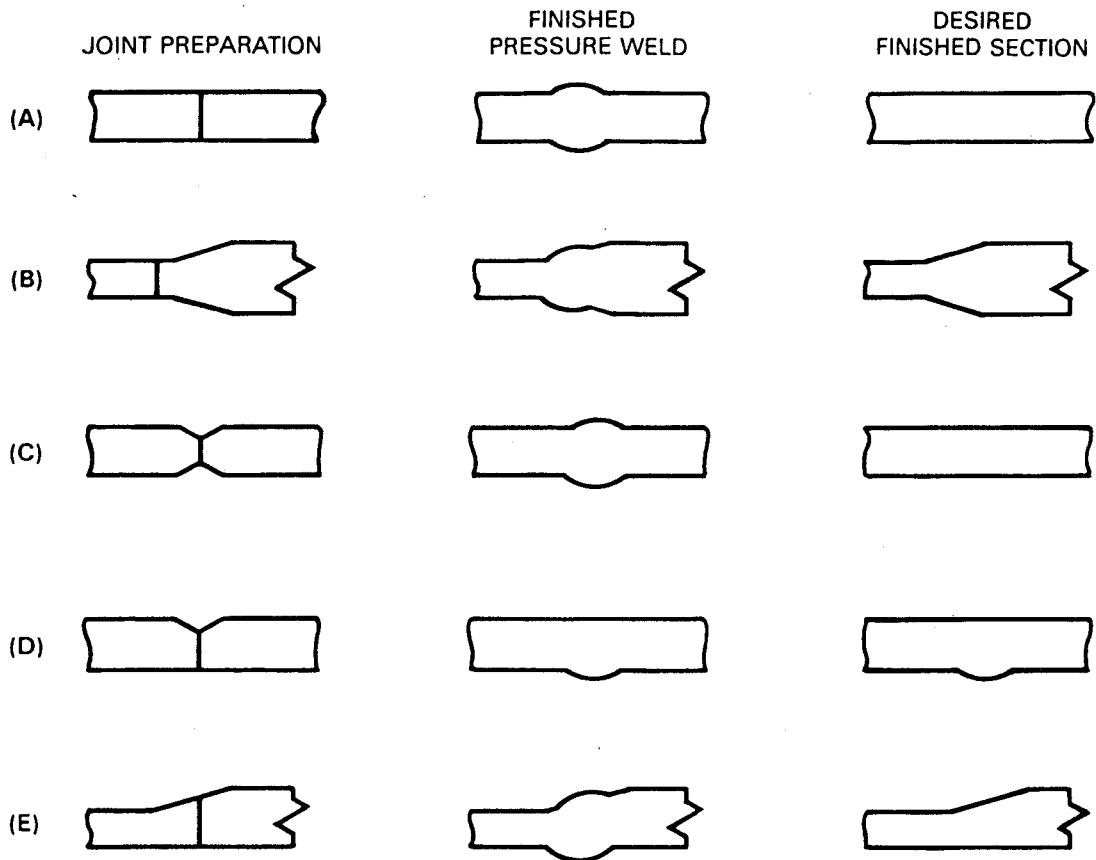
Joint Designs for Pressure Gas Welding
